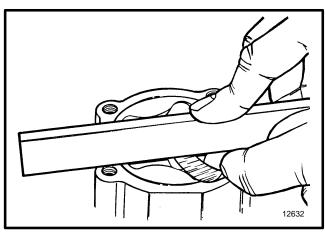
CHECK THE END CLEARANCES OF THE ROTOR
